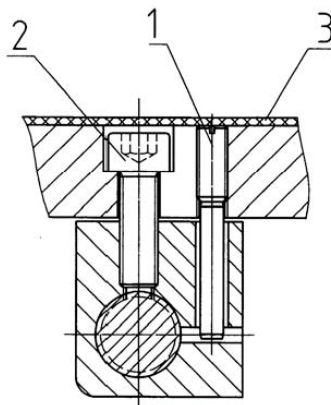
Diagram of adjusting lead screw and nut for bottom tool post
